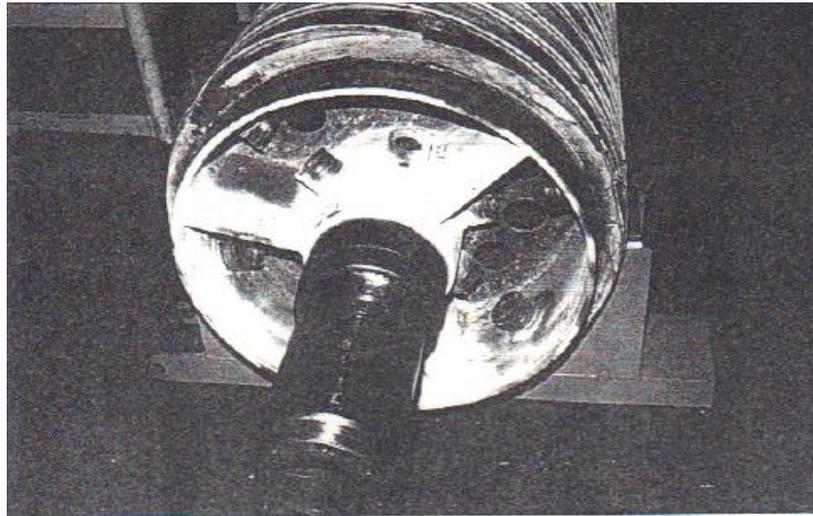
Chill Roll end showing stub shaft, plate stiffeners, outer cylinder, and cooling water tubes. Also shown is the residue white contrast paint from the magnetic particle crack detection testing completed.
